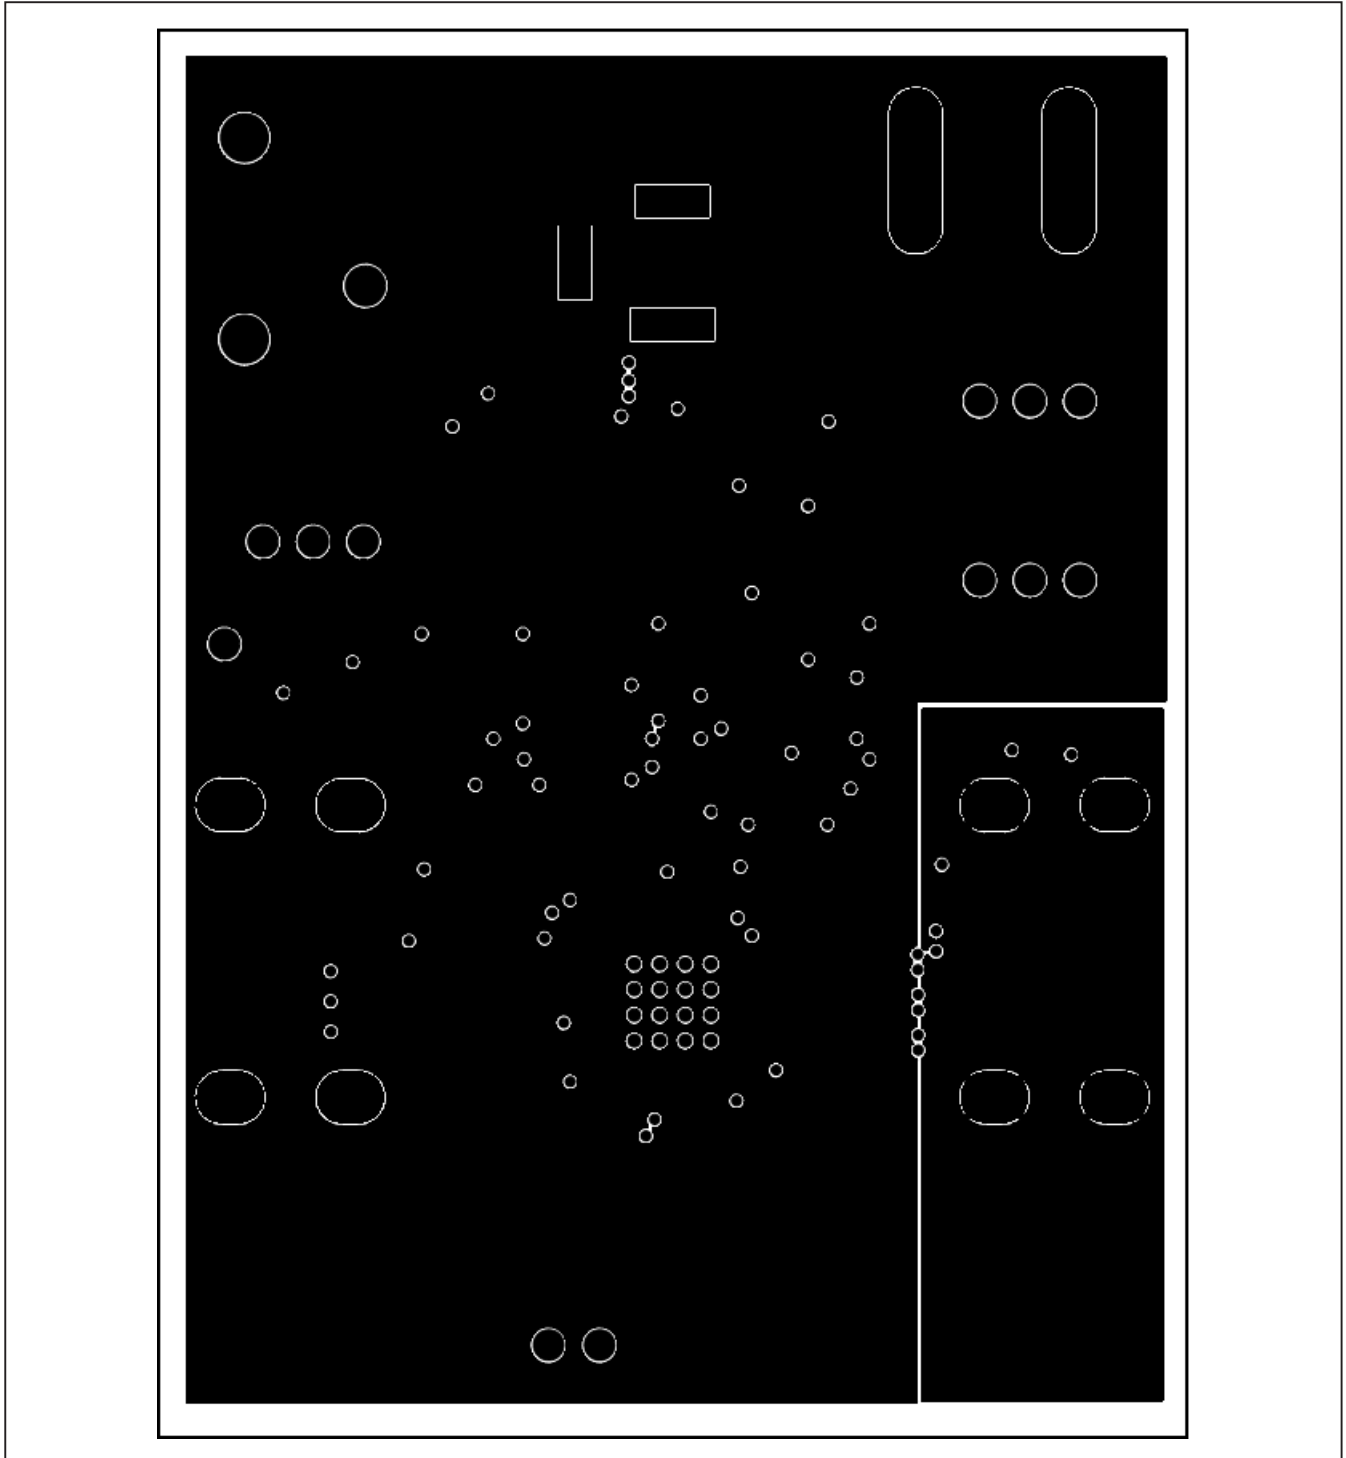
MAX3815A EV Kit PCB Layout—Power Plane
